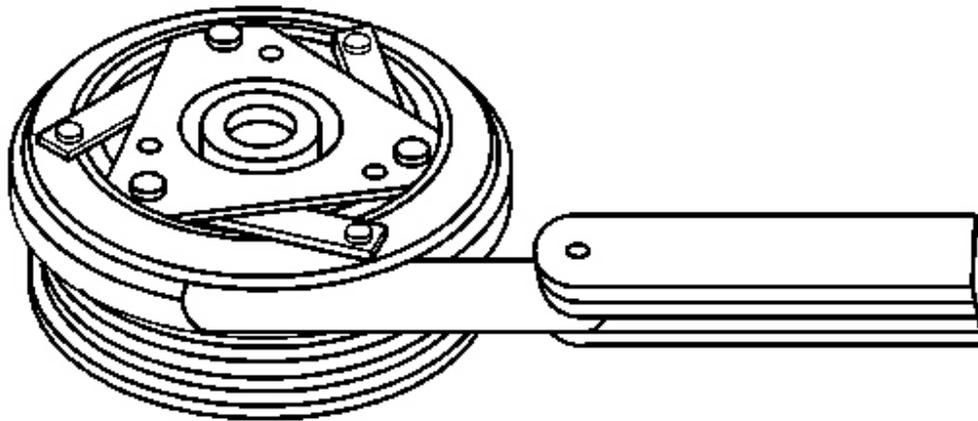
Measuring Air Gap Between Pulley & Drive Plate
